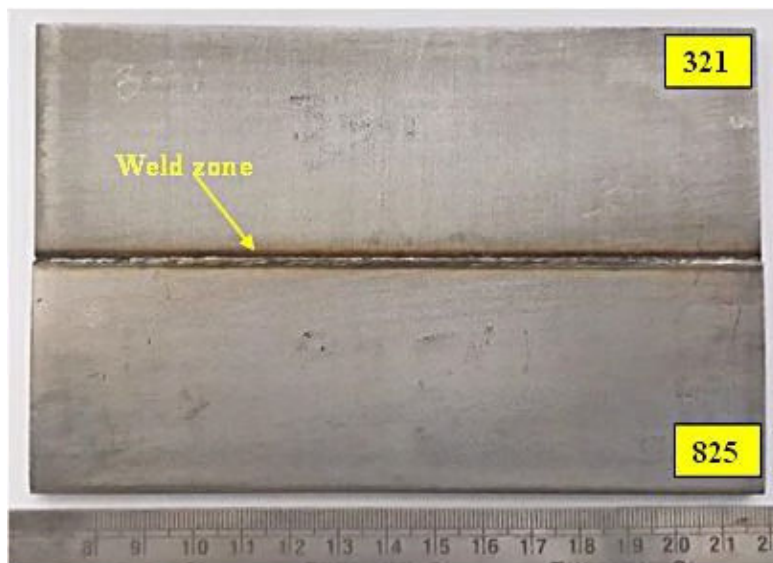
Photograph of 825–321 dissimilar CO<sub>2</sub> laser weldments.
